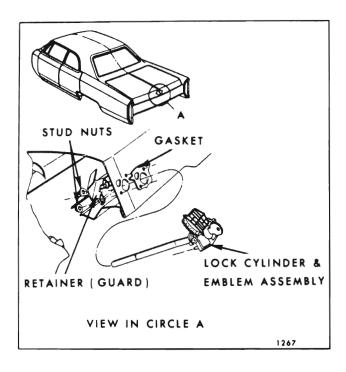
Rear Compartment Lid Lock Cylinder and Emblem Assembly
